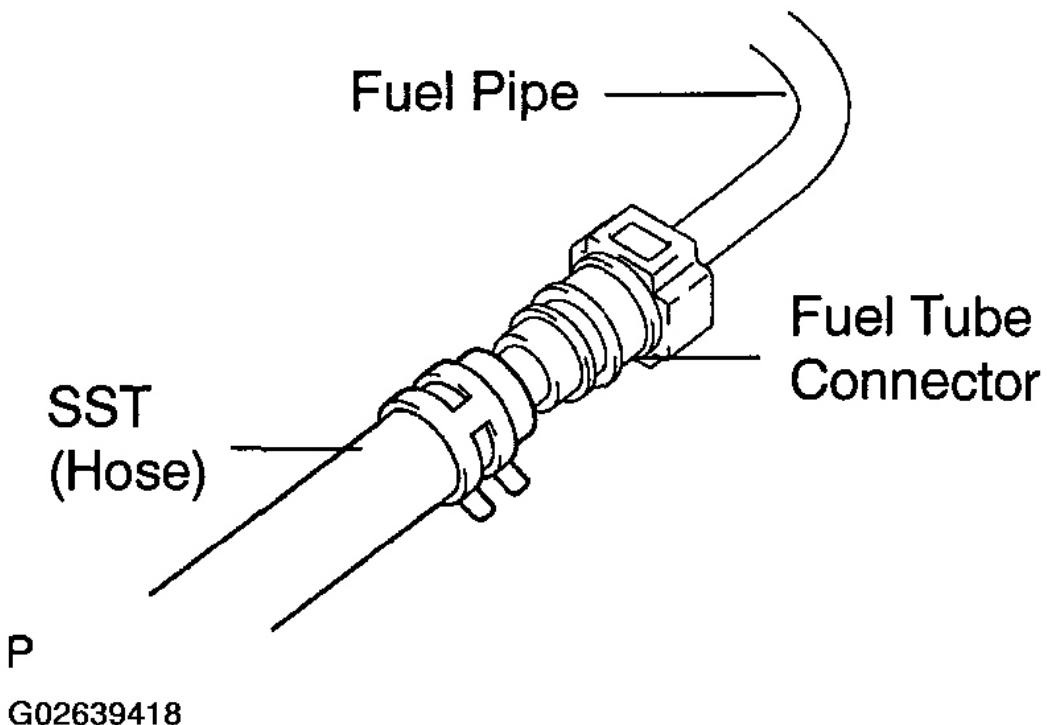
Connecting SST (Hose) And Fuel Tube Connector To Fuel Pipe
